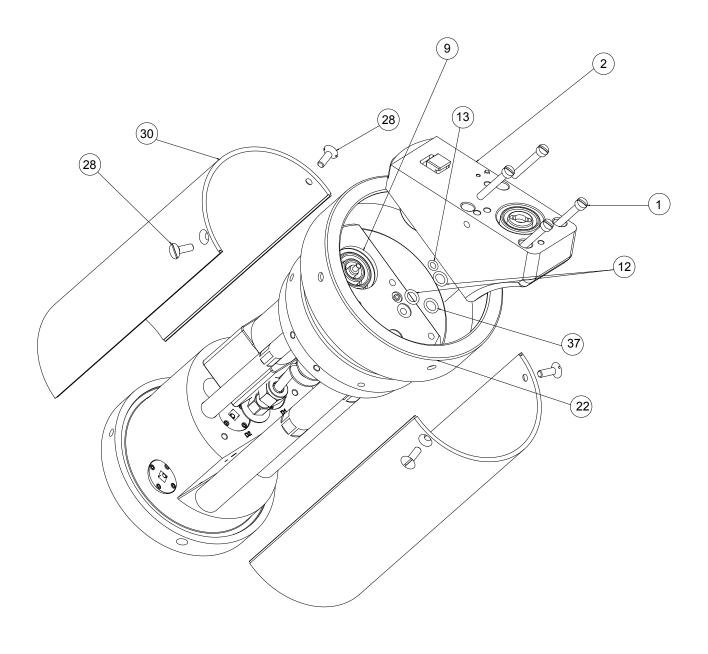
Mounting Block, Shroud Halves, and Retaining Ring Removal
